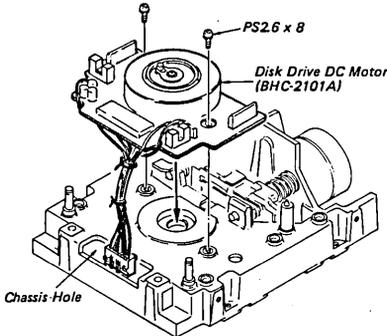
Disk Drive DC Motor (BHC-2101A) Replacement
